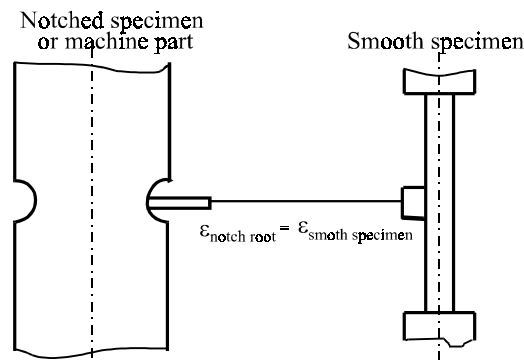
Simultaneous companion fatigue tests of notched specimen or machine part and of smooth specimen
